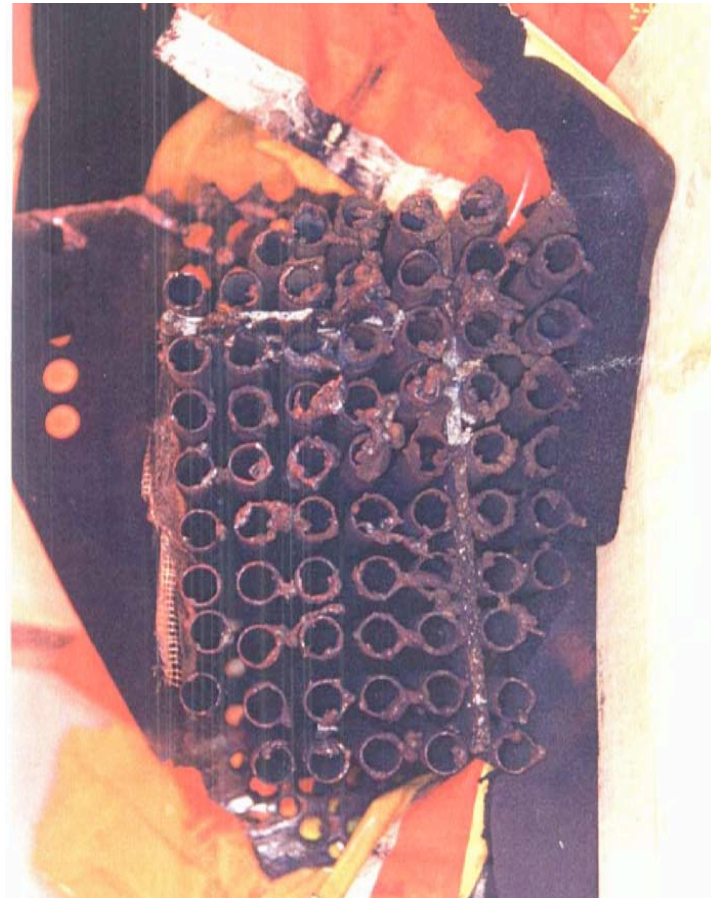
Tube support plate section TSP1 removed from steam generator B (SGB).
